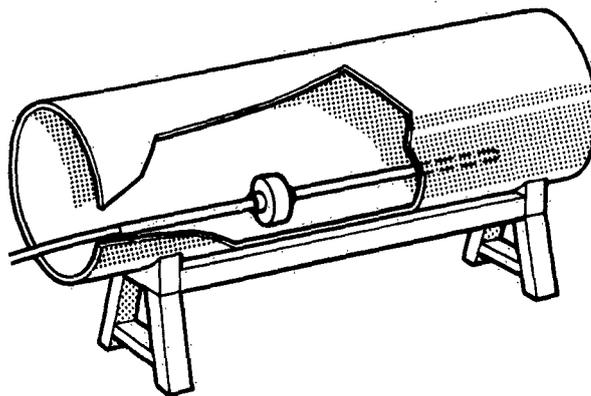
Portable grinder for smoothing longitudinal welds
